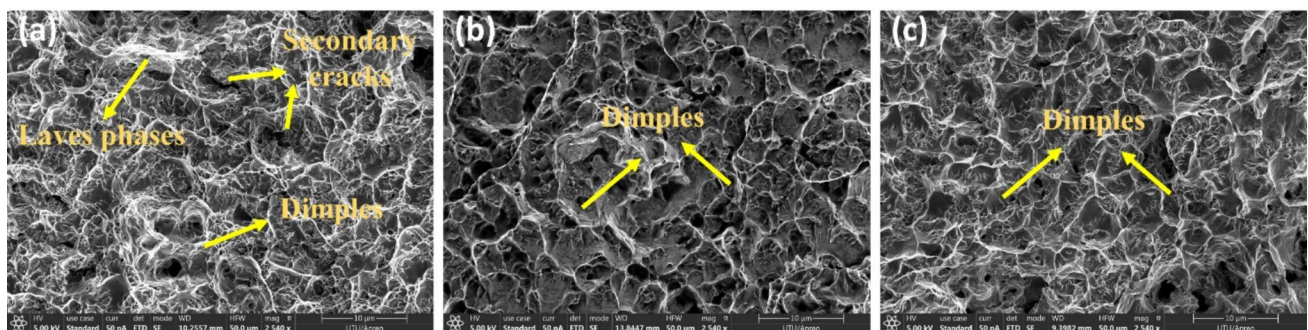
Tensile fracture surface of a ABW, b HTW, c WW
